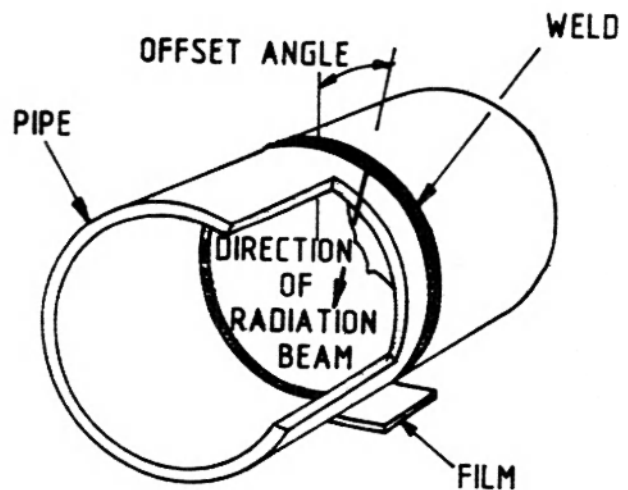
Schematic representation of the double-wall, single-image inspection technique applied to a circumferential butt weld in a large-diameter pipe, showing relation of radiation beam, weld and film
